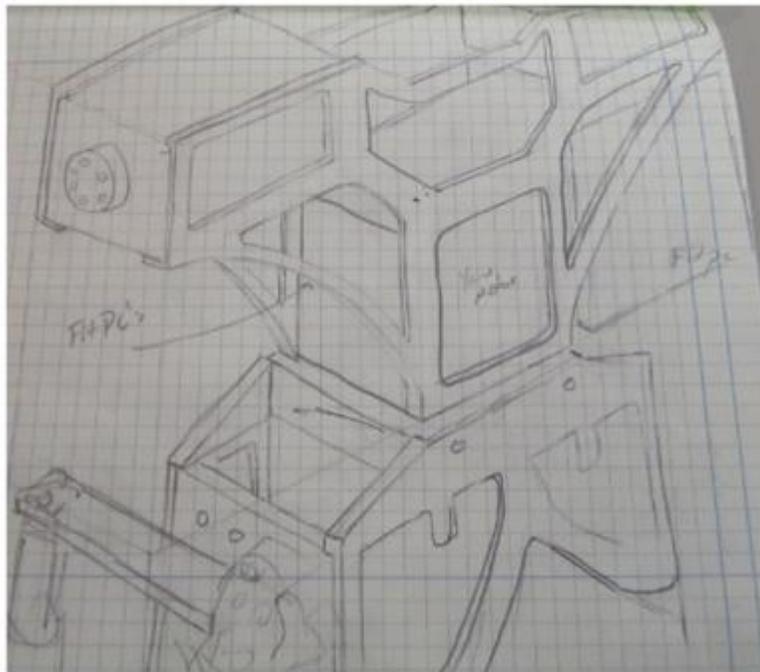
Yaw rotation torso design that uses two parallel and identical side plates as main frame of the design. The motors set on these plates and bolts are used to fix the structure.
